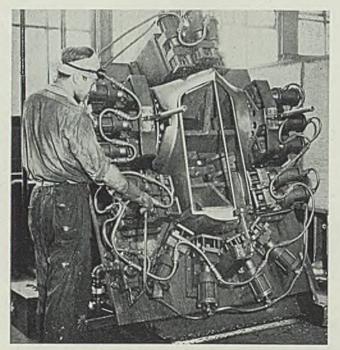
Specially built multiple hydraulic punch in which radiator shell is clamped over a die and 22 varioussized holes for assembly bolts, hood lacing, etc., are punched simultaneously
